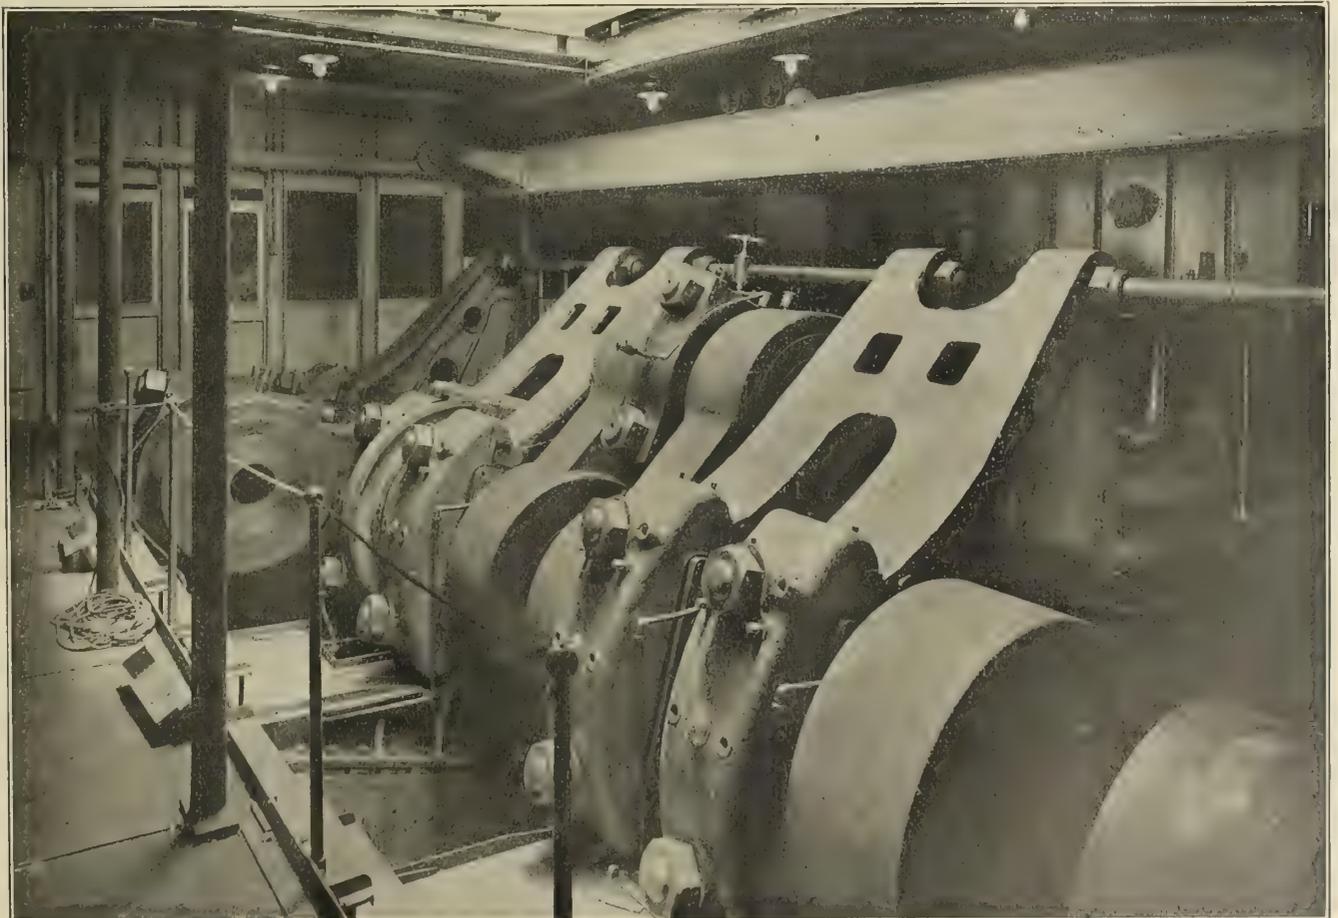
MAIN ENGINE CRANKSHAFT AND PILLOW BLOCKS
